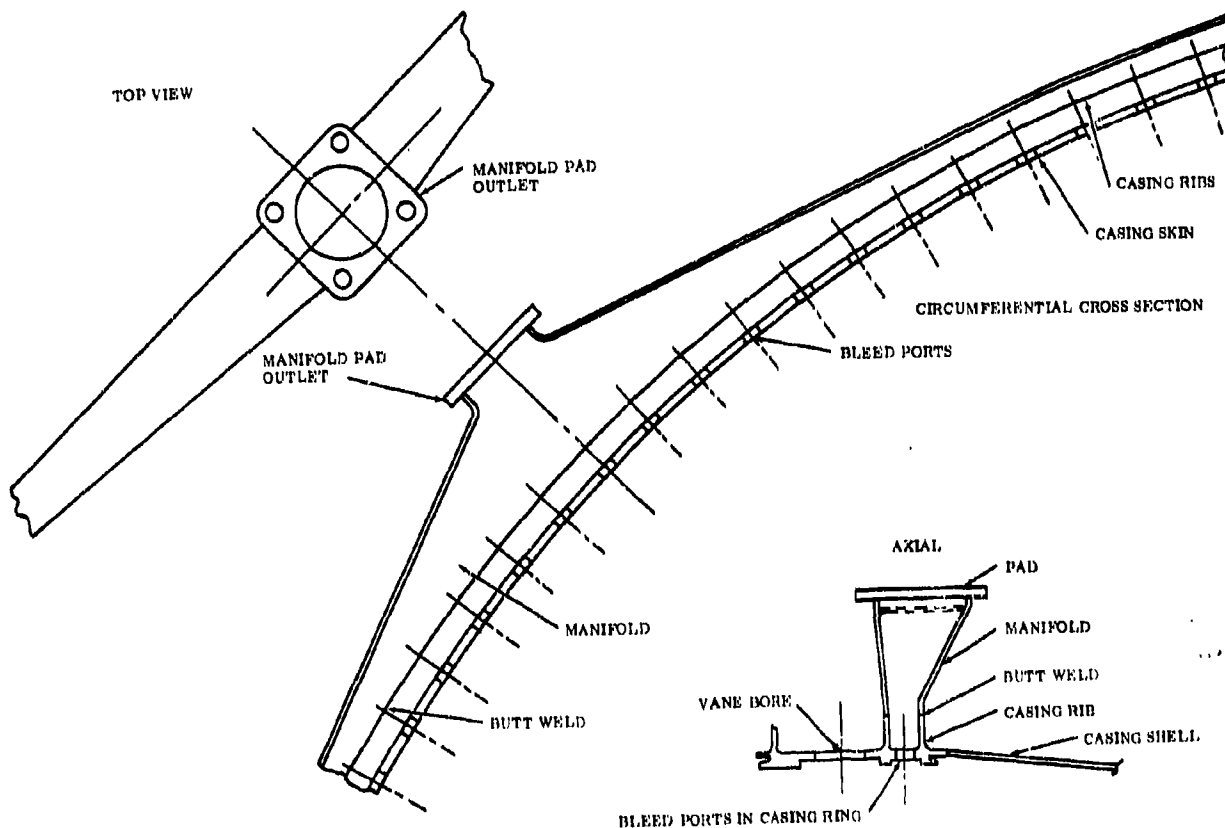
INTERSTAGE BLEED EXTRACTION PORTS, MANIFOLD AND OUTLET PARTS
